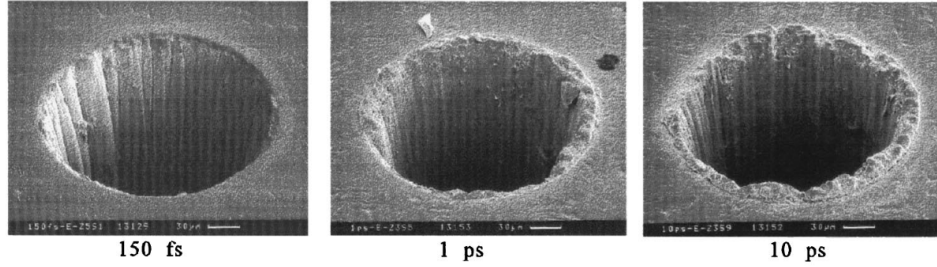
Femtosecond laser hole drilling is shown to produce less residual damage and a smaller heat-affected-zone (HAZ) than longer pulse laser machining and continuous-wave (CW) lasers. Laser machined holes using 780 nm wavelength at (right) 10 picosecond pulsed laser, a (middle) 1 picosecond pulsed laser, and a (left) 150 femtosecond pulsed laser [116].
